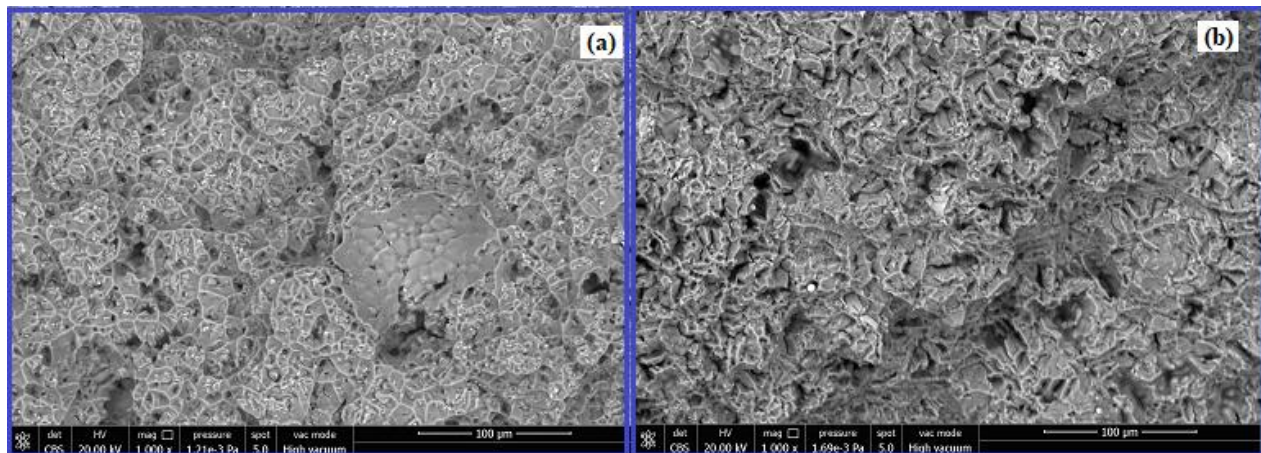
Post-tensile test macro structure images of broken surfaces (a) MIG-welded samples (b) TIG-welded samples
